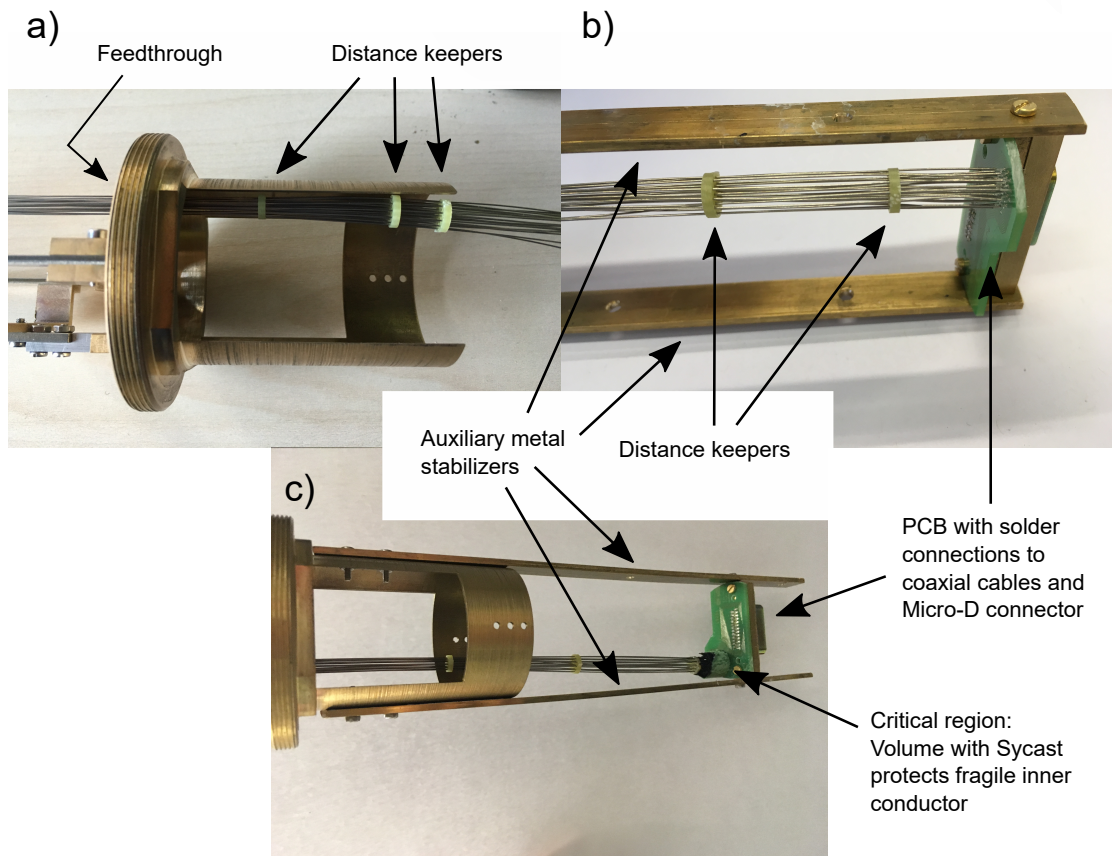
Distance keepers not only keep the cables aligned in parallel configuration, it prevents them from rotation as well. The auxiliary metal stabilizers are important to have a fixed geometry while soldering into the PCB. They are removed after the Stycast is cured. The PCB is carefully pushed up to its final position.
